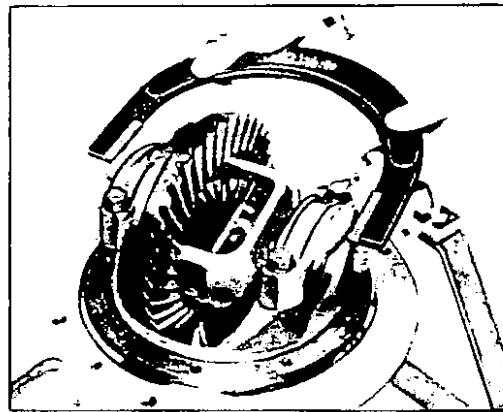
Measuring the dimension between left and right hand bearing caps (see text).
